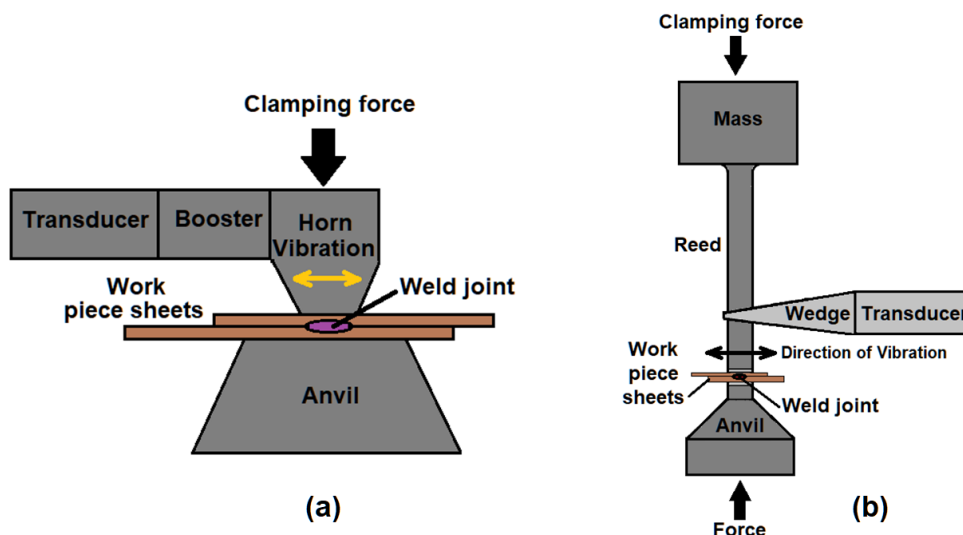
Ultrasonic welding machines (a) Lateral Drive type (b) Wedge Reed type
